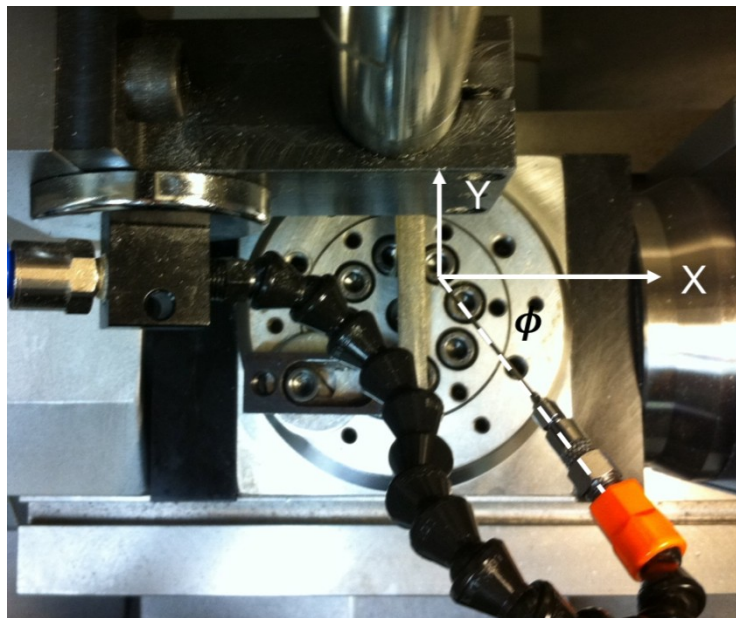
Coolant nozzle angle setup- ϕ direction (top view)
